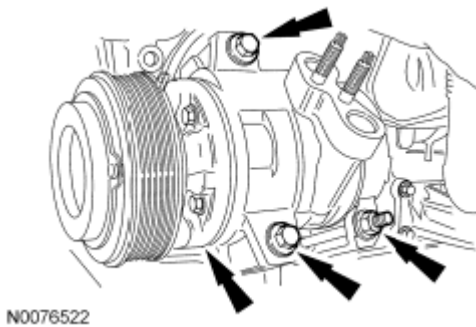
Locating A/C Compressor, Stud Bolts And Bolts
